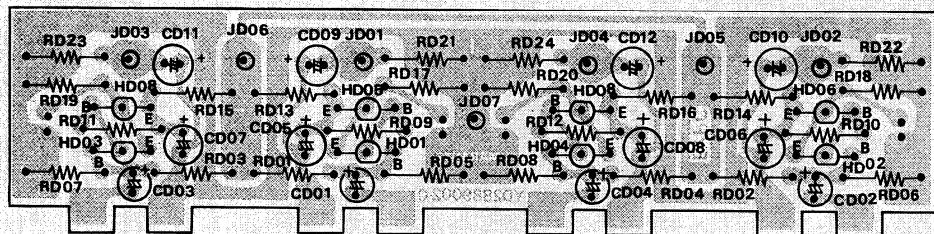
Tone Amplifier Assembly PD01 Component Locations
